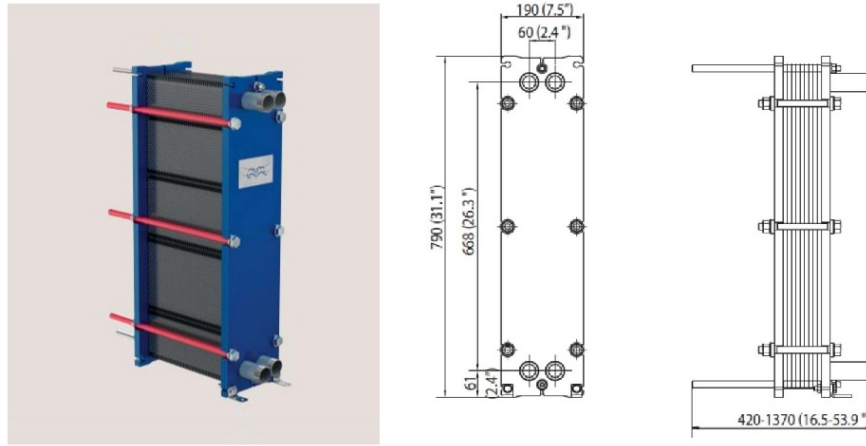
Left) The original TL3BFG10 gasketed plate heat exchanger by Alfa LavalTM. Middle) Dimensions outer pressure plate. Right) Dimensions of the inlet port length and suspension tube in mm (inches)
